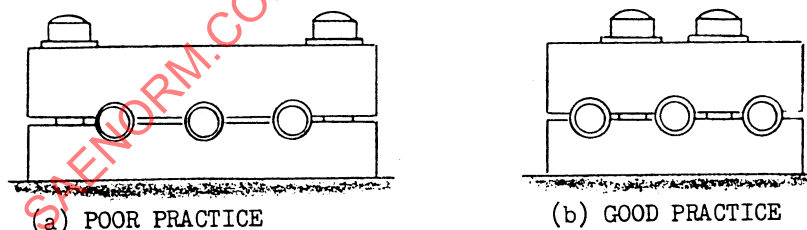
SUPPORT BLOCK ATTACH SCREW PLACEMENT
